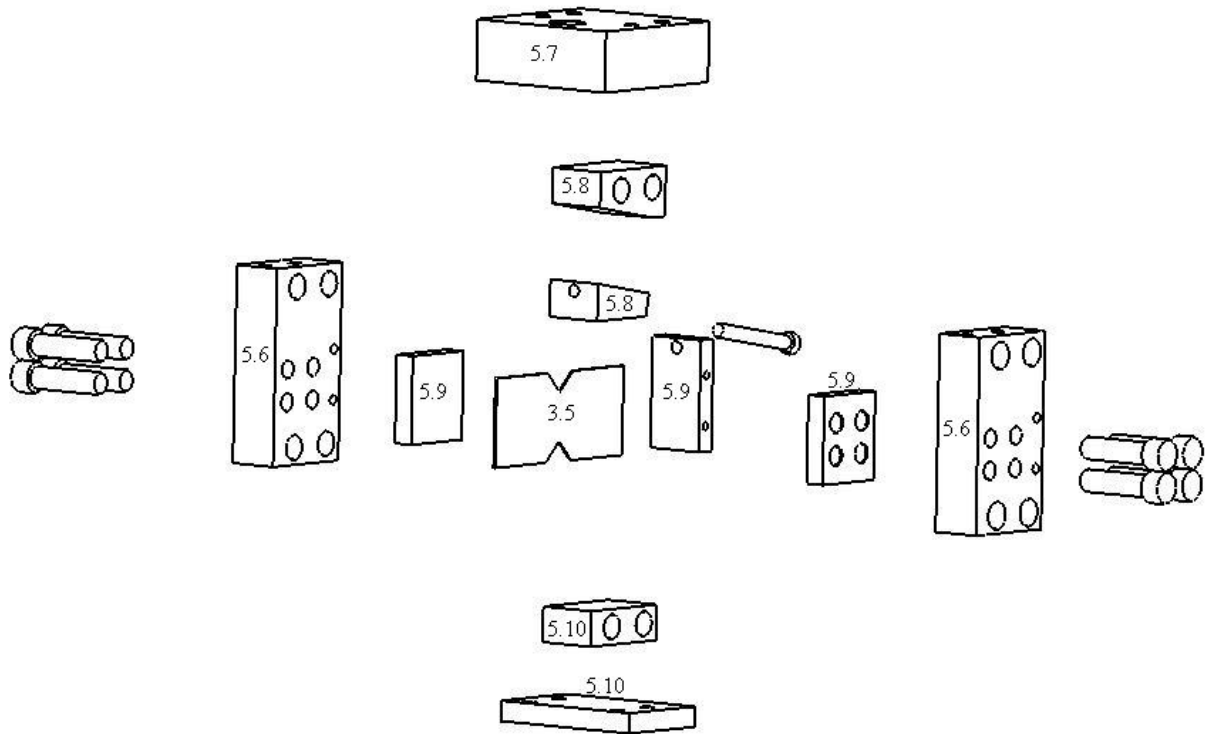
An exploded view of the Combined Loading Fixture. Numbers on the components indicate the figure where the machine drawings can be found for that component.
